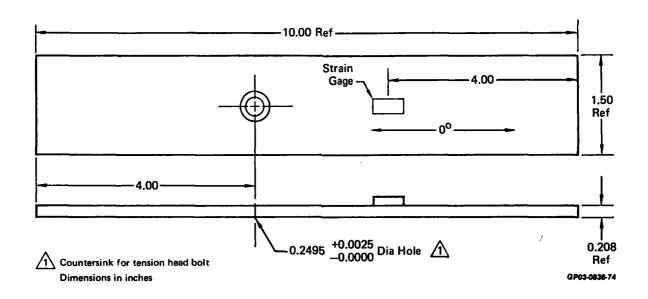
Test Specimens - Unloaded Hole, Static Test (UHST)
